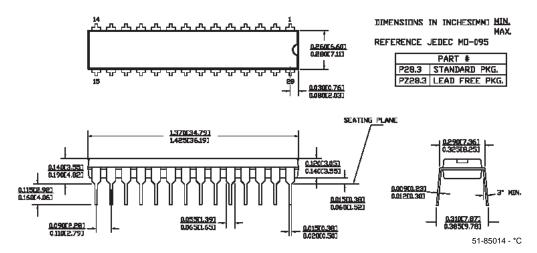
28-Lead (300-Mil) Molded DIP
